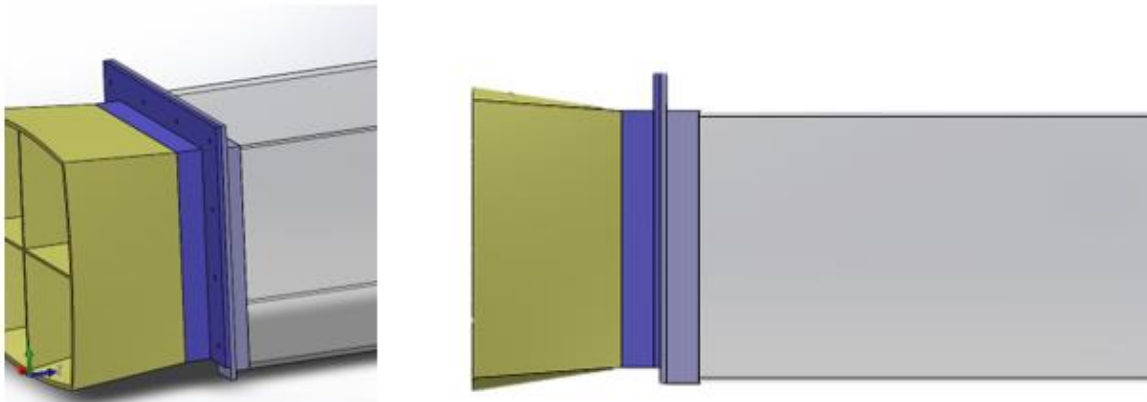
Initial flange design, which gets attached to the edges of the sections of the Wind Tunnel increasing its length.
